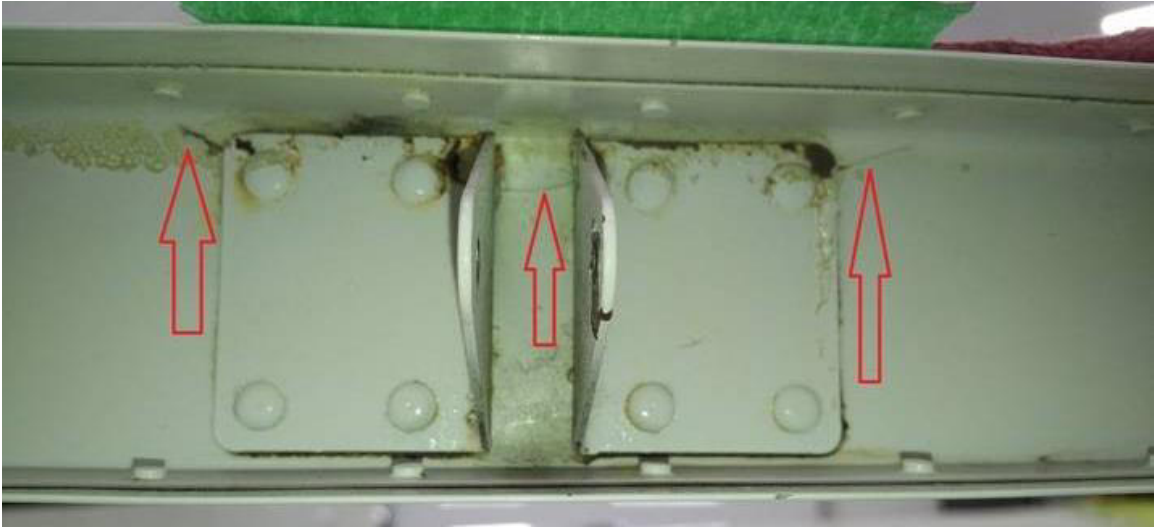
EXAMPLE 1 - CRACK LOCATIONS – AFT SIDE OF SPAR
